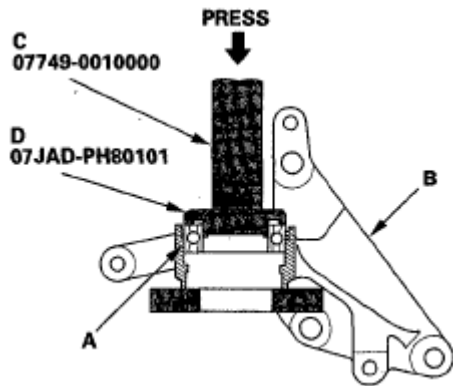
Identifying Intermediate Shaft Bearing Into Bearing Support
